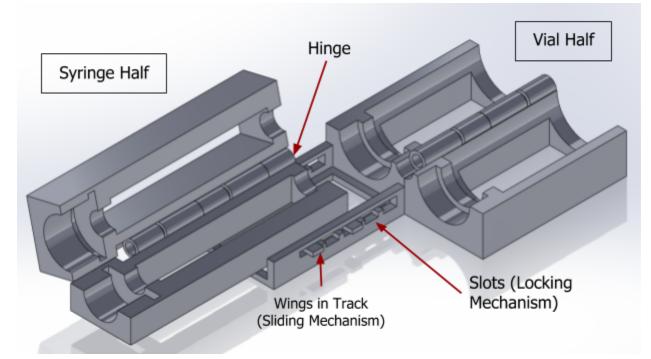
Depicted above is the Drawer Model design in Solidworks.
